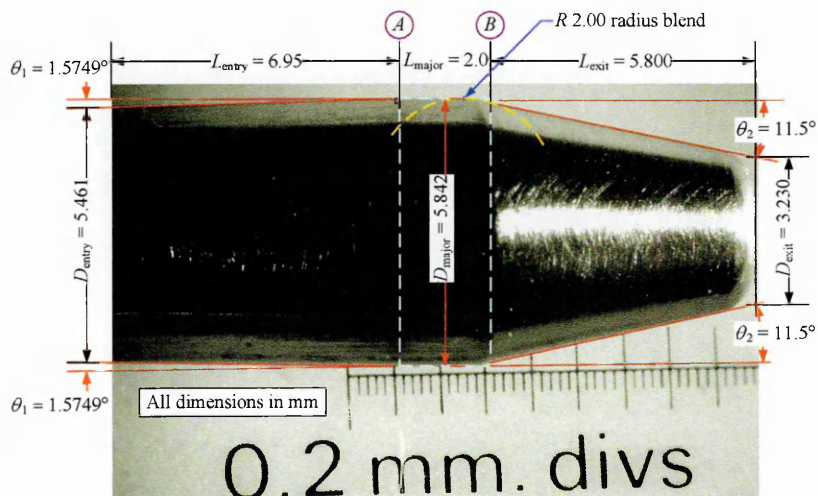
Physical dimensions of oversized section of cold-working mandrel.
